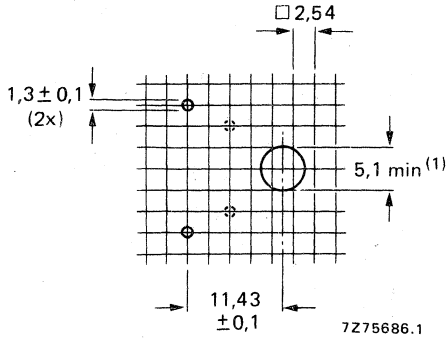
Hole pattern for mounting on a printed-wiring board. Dotted holes only for AT4042/42.
